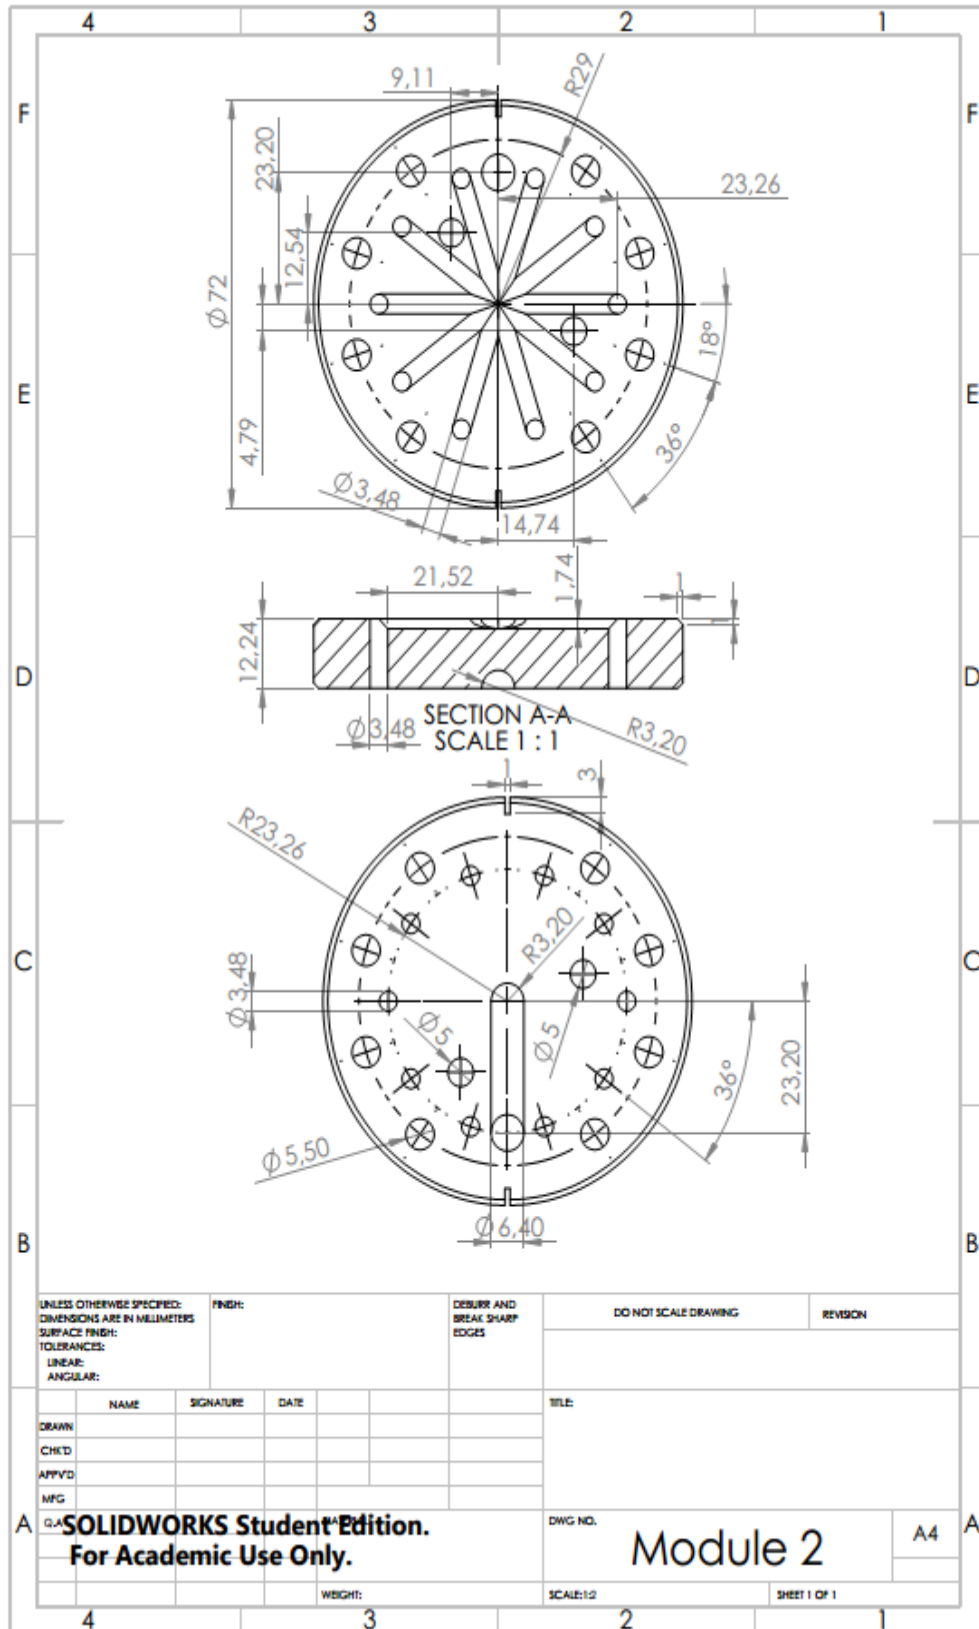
2D drawing of the module 2 of the filament coextrusion die.
